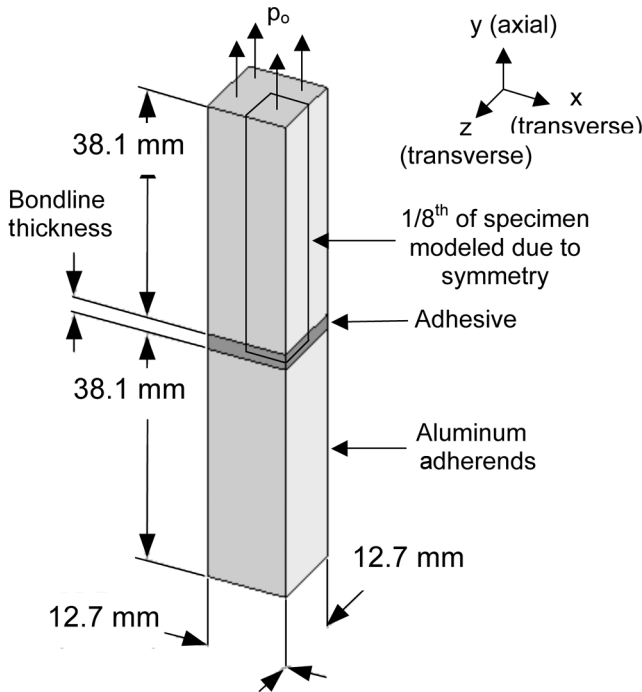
Geometry of adhesively bonded butt-tensile specimen.
